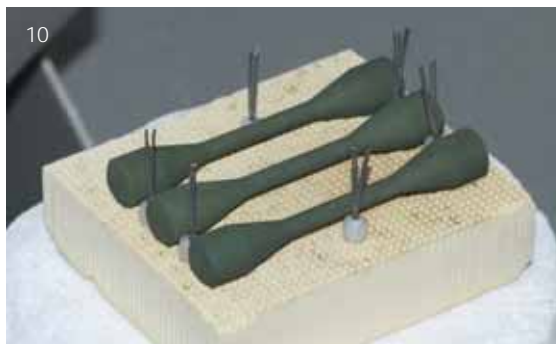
and 10 Ceramill Sintron tensile test pieces before and after heat treatment
